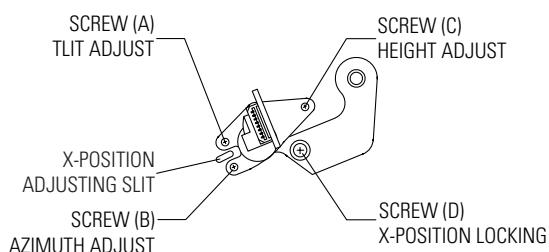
Location of ACE Head Adjustment Screw
